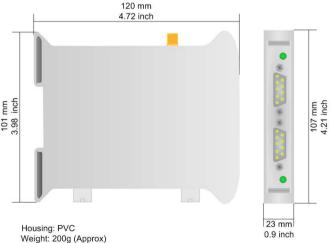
Mechanical dimensions scheme for HD67300-111-A4, HD67300-121-A4
